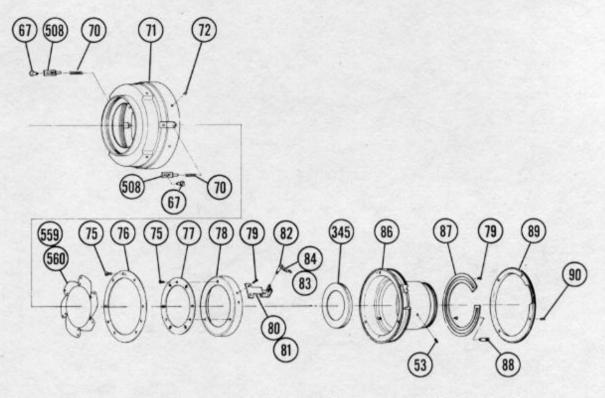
Diaphragm Housing Assembly, All Mounts (Ref. 509-514, Pg 58)
